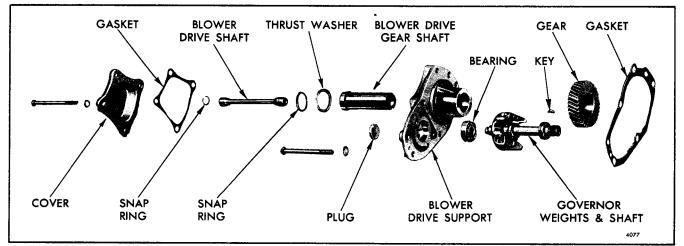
Blower Drive Support Details and Relative Location of Parts
